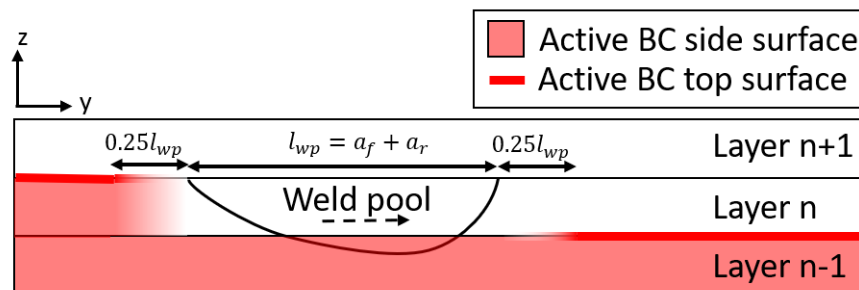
The locations at which the boundary conditions for the side and top surface of the part are active, relative to the weld pool.
